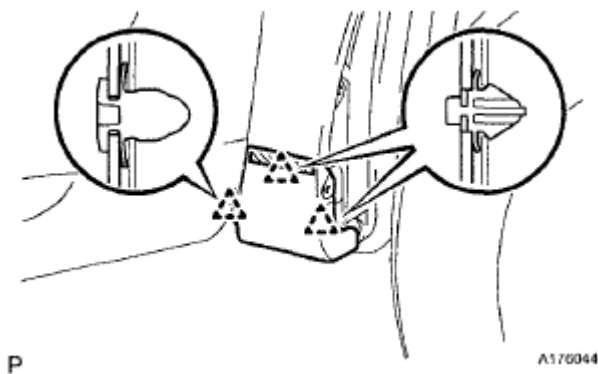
Identifying Front Fender Moulding Sub-Assembly RH And Clips
